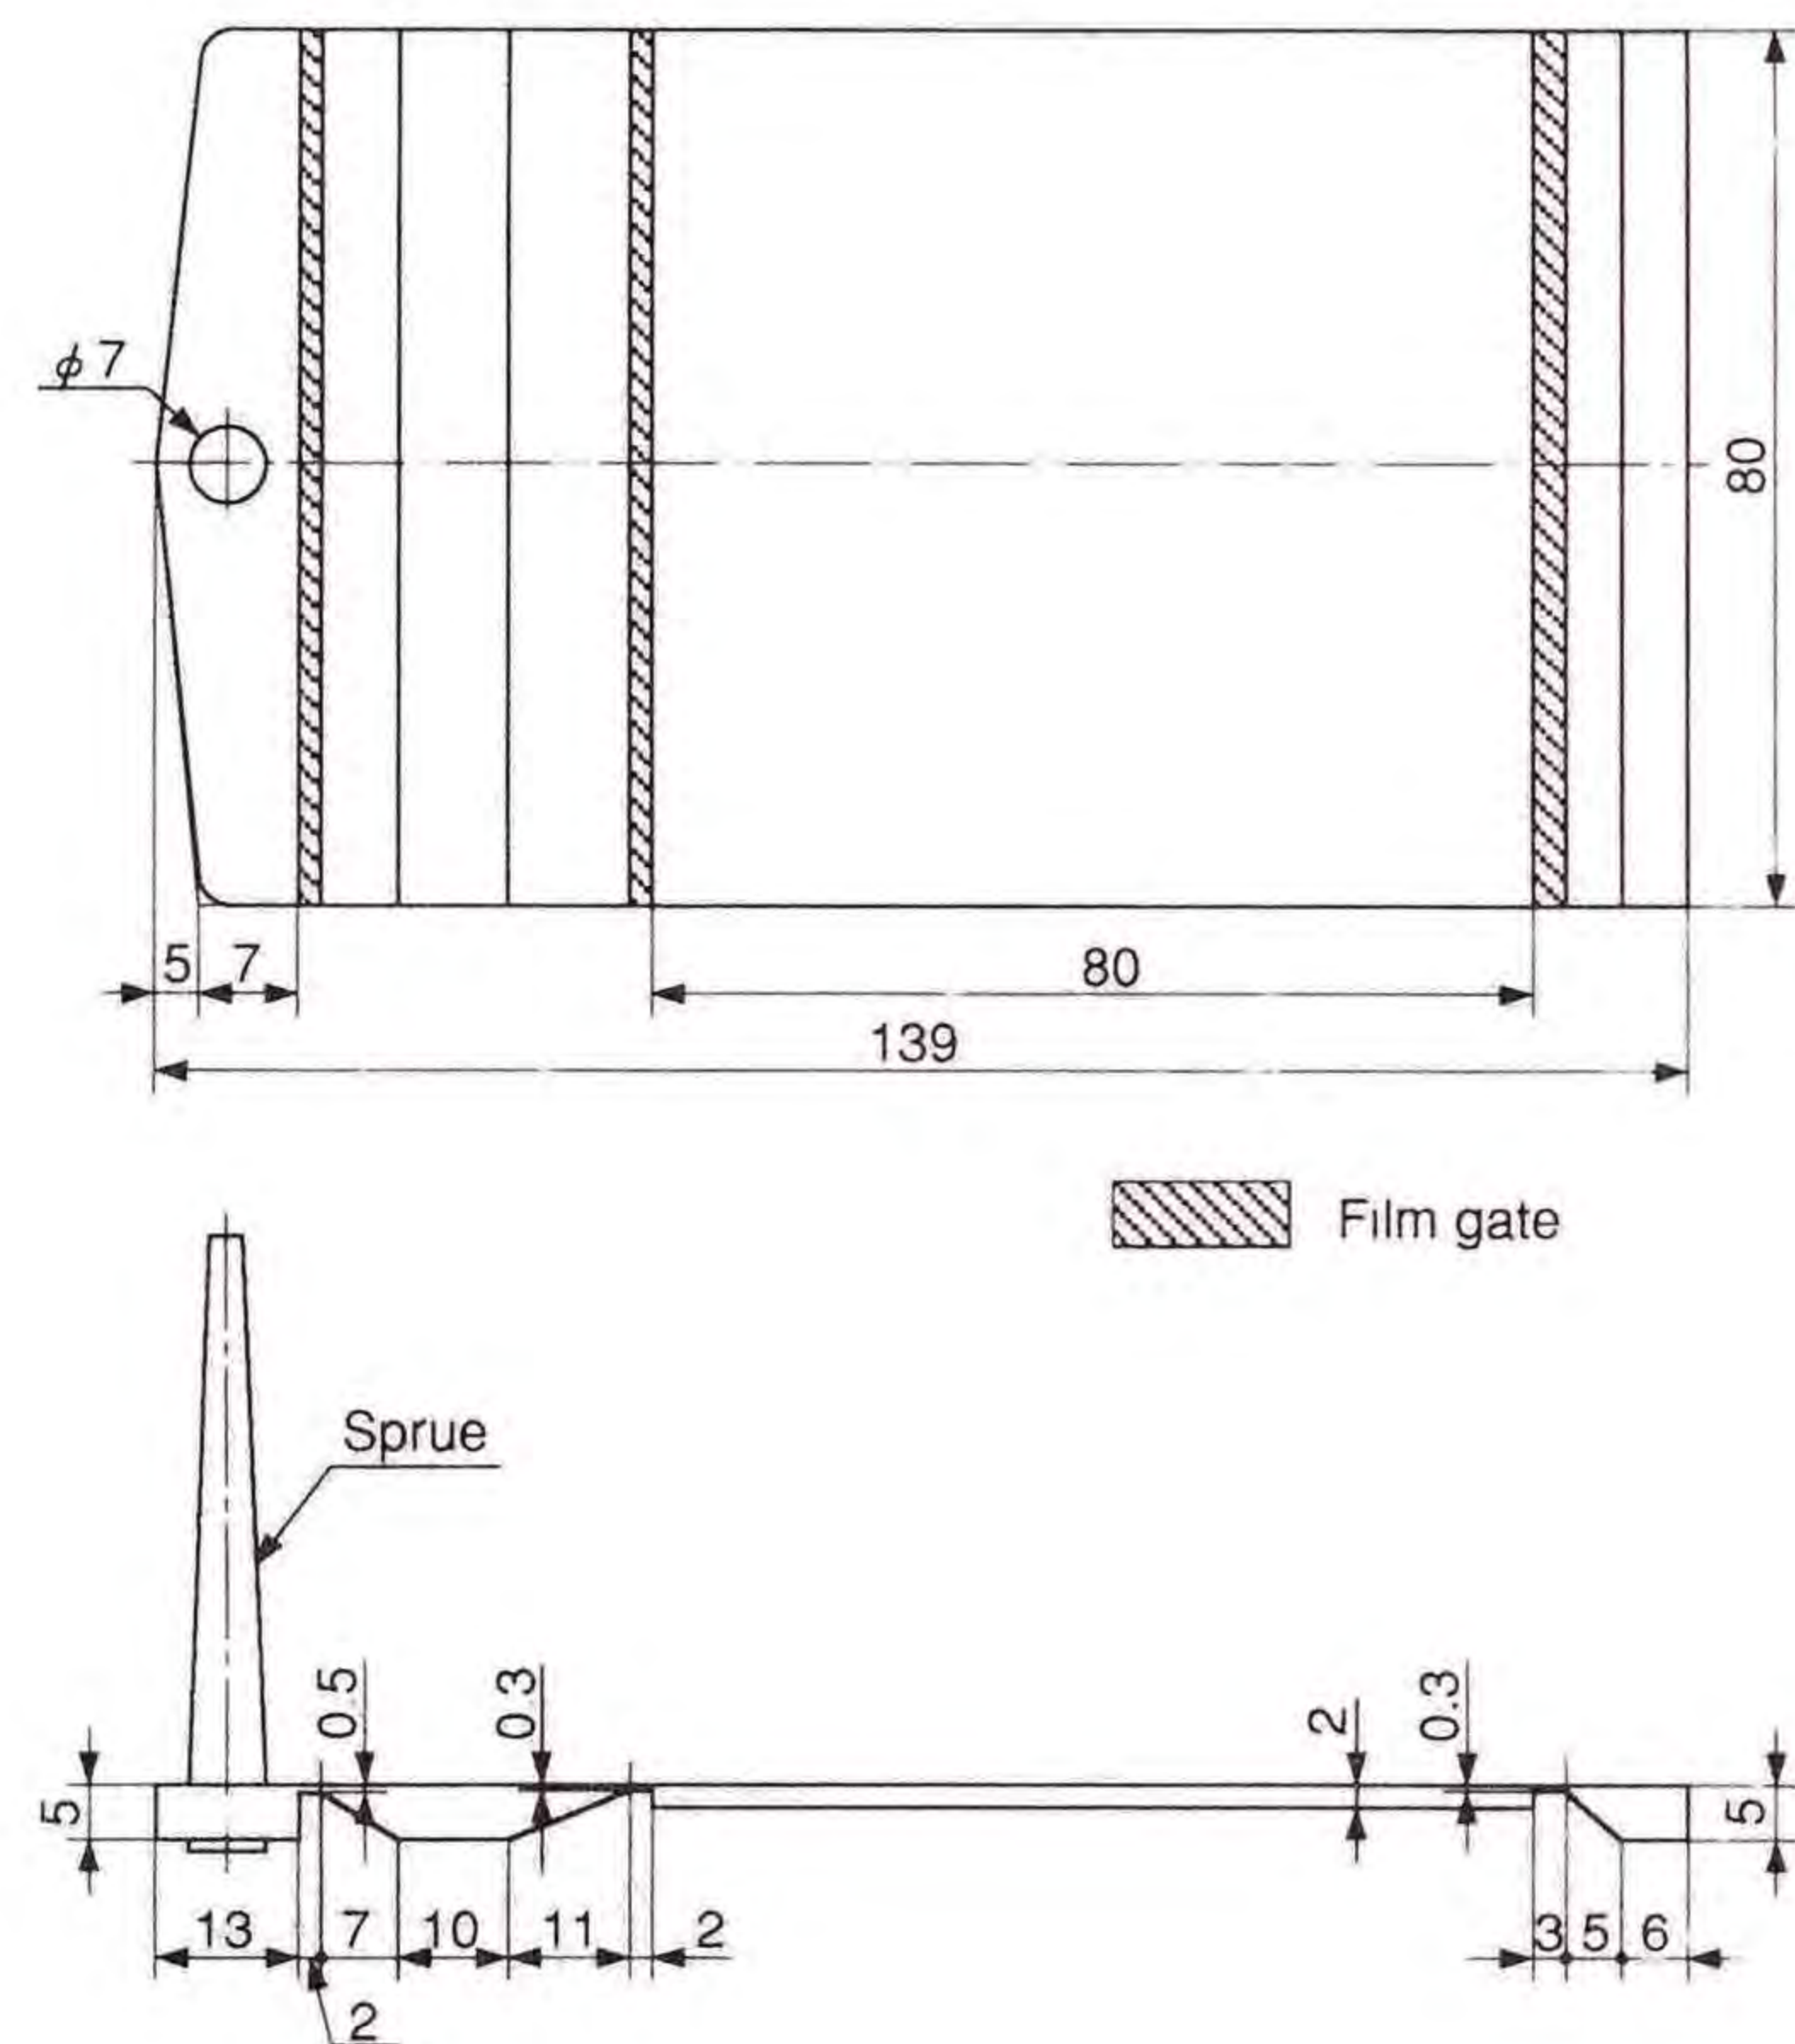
Shape and dimensions of the specimen. (Film gate)
